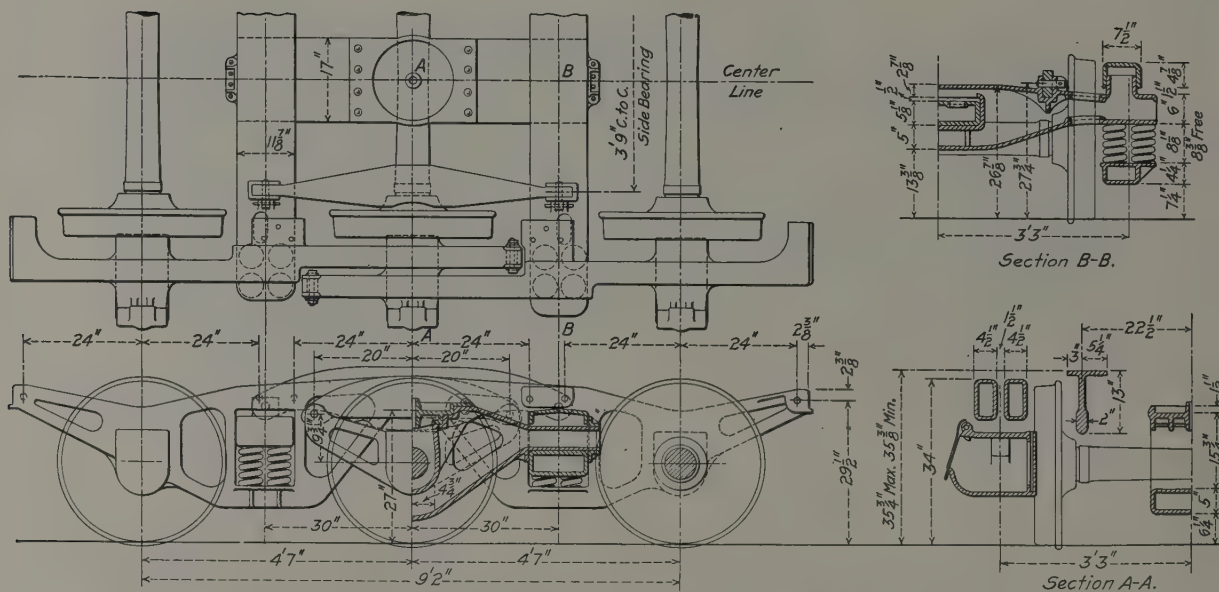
General Drawing of Six-Wheel Truck Shown in Figs. 998 and 1000.
